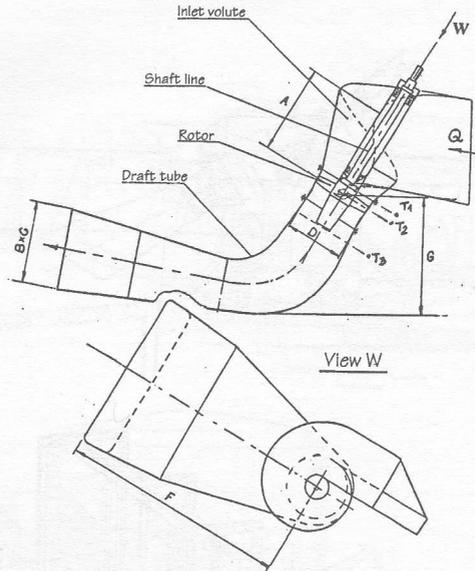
Concept drawing of flow ducting in the proposed design. 1 – volute-shaped inlet chamber, 2 – rotor chamber with rotor, 3 – draft tube, 4 – shaft line.
